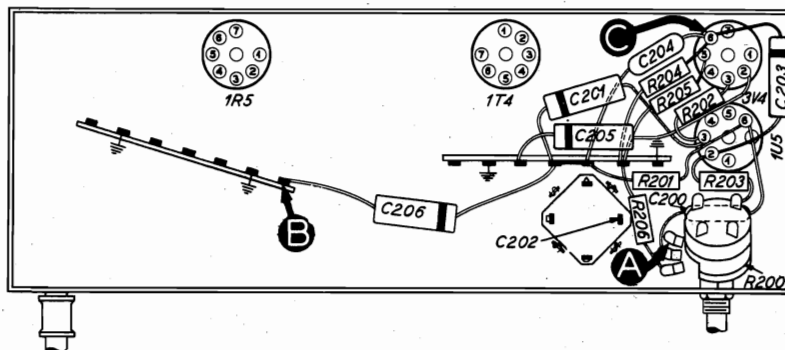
Bottom View, Showing Section 2 Test Points TP-5355B-1
